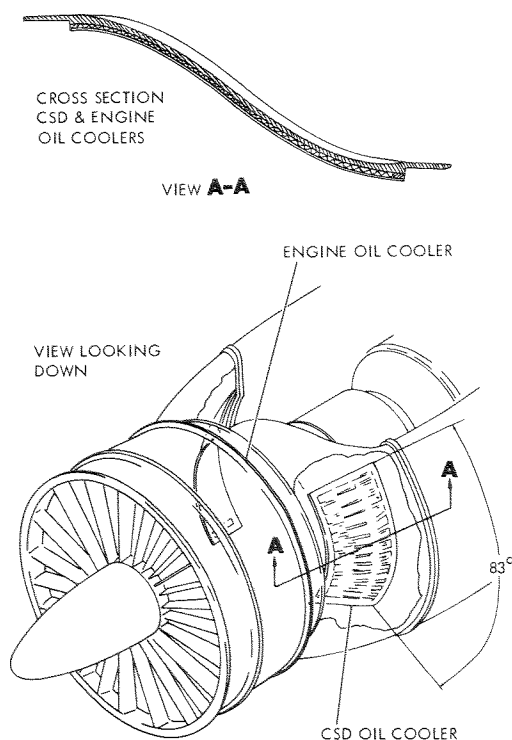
OIL COOLER, ENGINE AND CSD.
